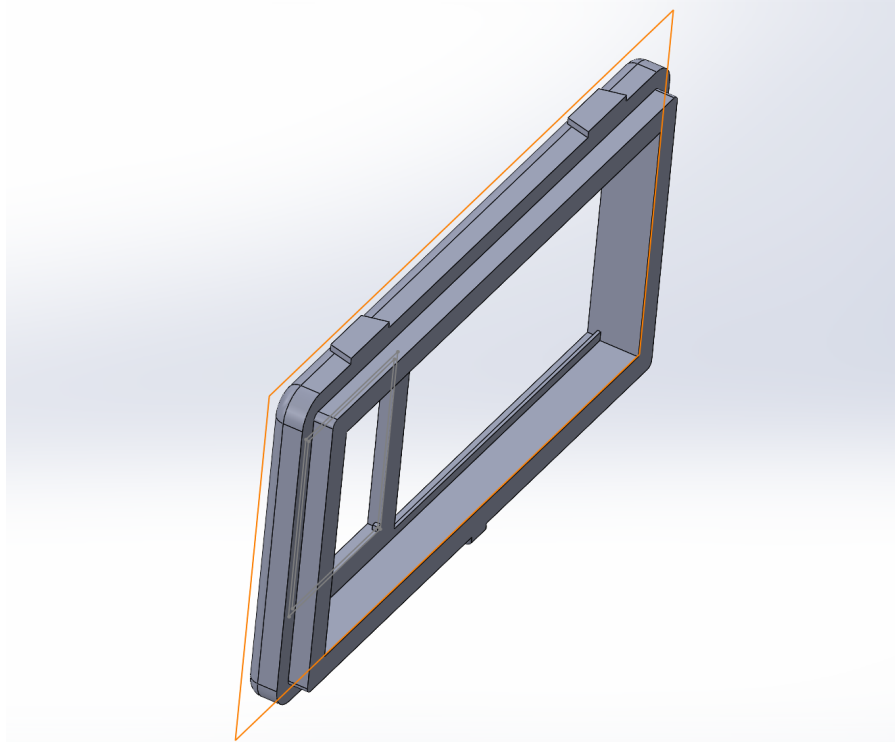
3D CAD Model of Version 3 Lid Design Below
